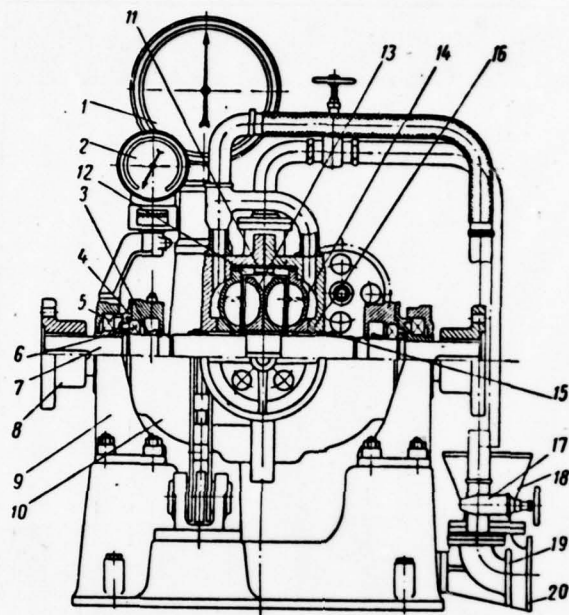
Longitudinal section of hydraulic brake: 1 - dynamometer (weight head); 2 - tachometer; 3 - regulator of tachometer; 4 - lock of bearing; 5 - radial bearing of stator; 6 - main bearing; 7 - shaft; 8 - half-coupling; 9 - buck stay; 10 - lower half-yoke; 11 - shutter/valve; 12 - hole for yield of water; 13 - rotor; 14 - elliptical pockets of stator; 15 - pack (ing) nut; 16 - stuffing-box seal; 17 - valve/gate of feed control of water; 18 - drainage funnel; 19 - flange of feeding water pipe; 20. the flange of discharge lead.
